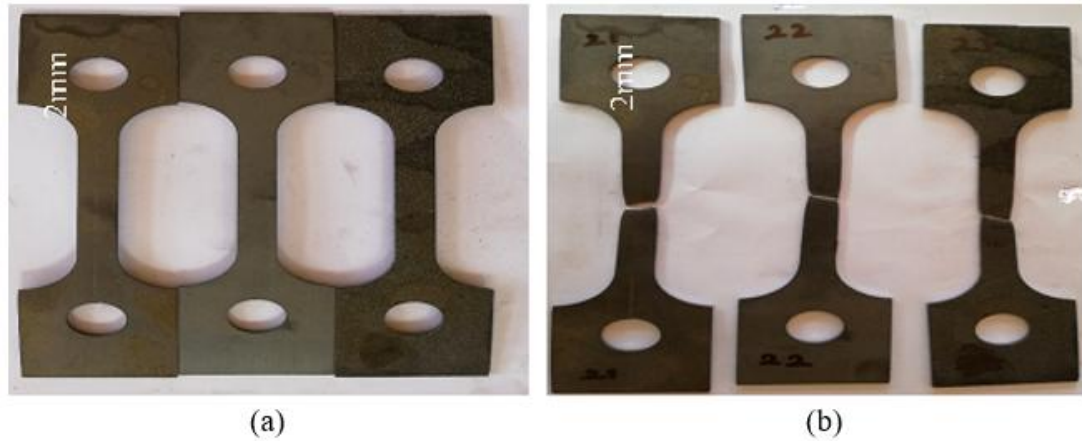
(a) Steel tube before testing (2mm), (b) steel tube after testing (2mm).
